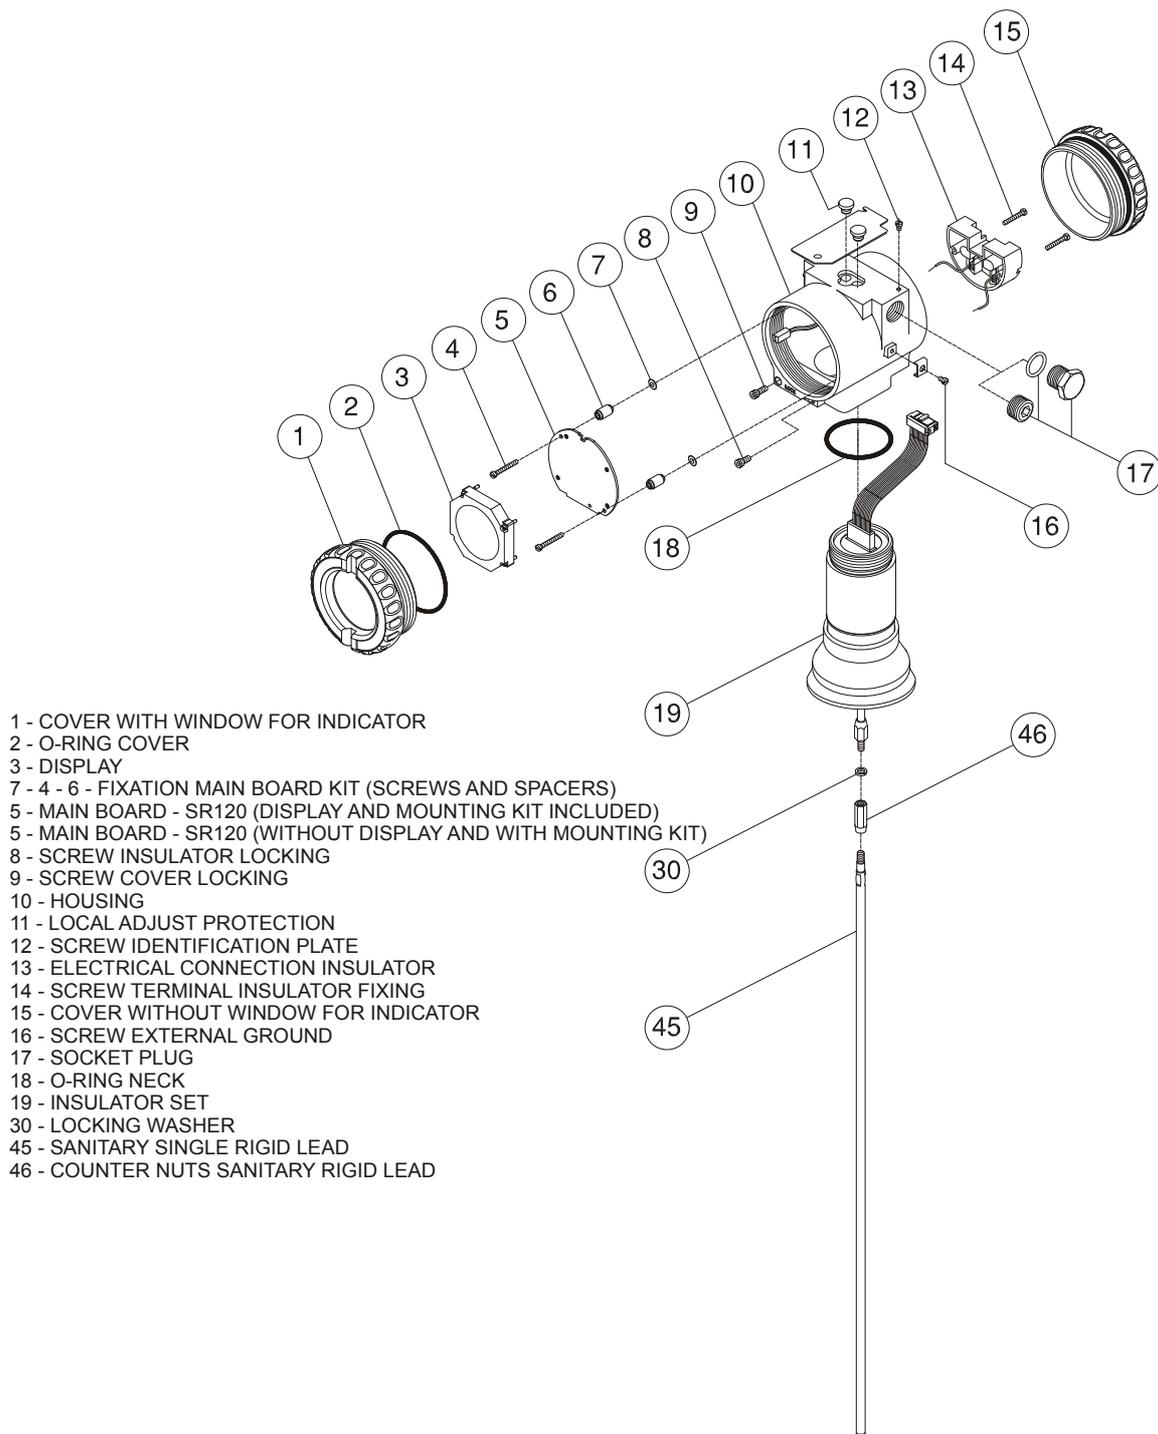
RD400 Exploded View – Tri-Clamp Connection and Sanitary Probe
